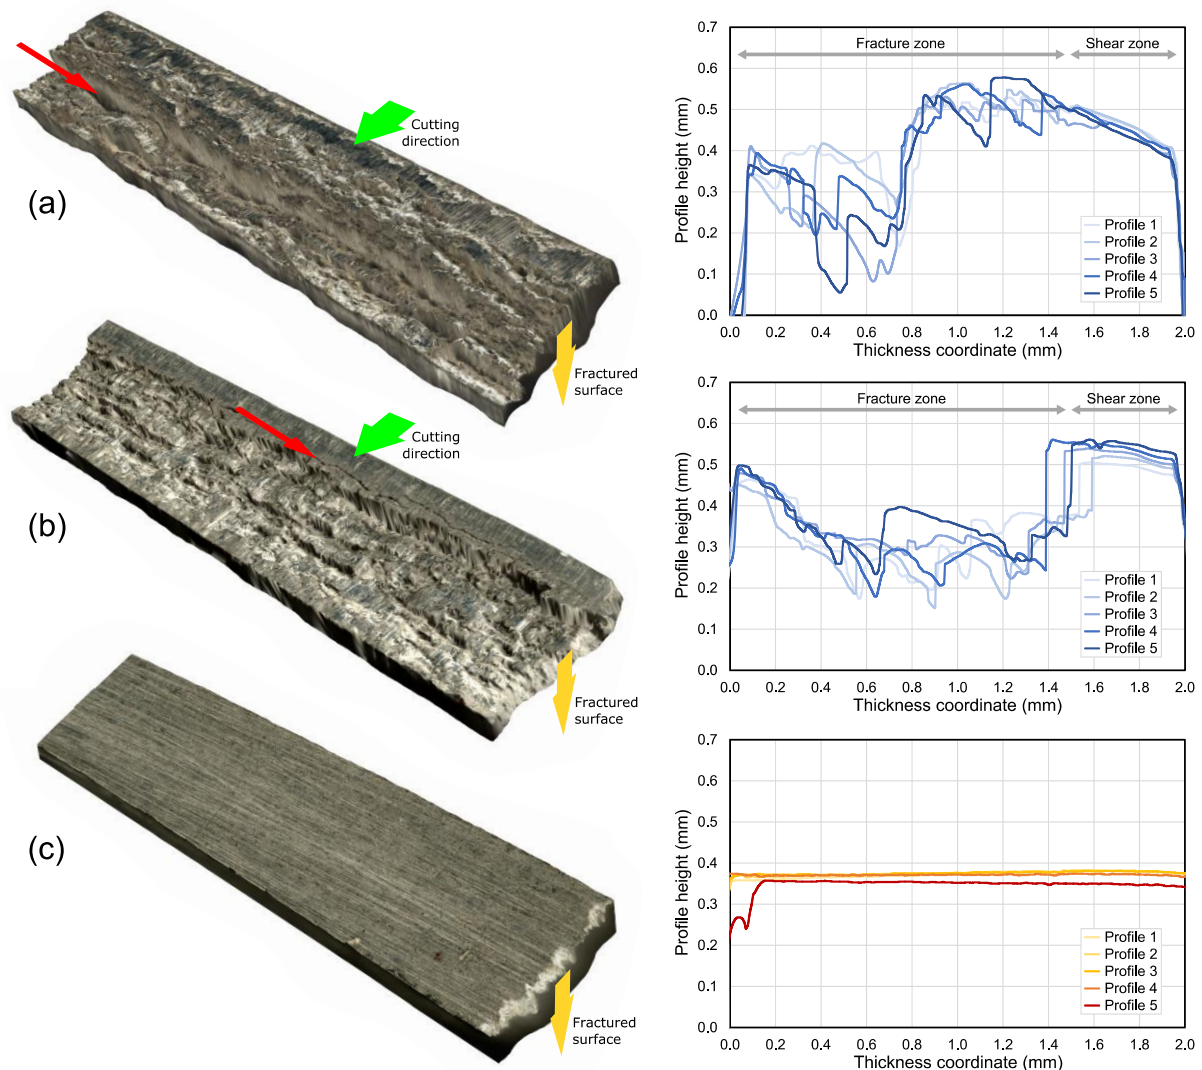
Typical surface topographies and cross-section profiles of (a,b) shear-cut and (c) milled edges of the AZ91 sheets; profile 5 was located next to the fracture surface
